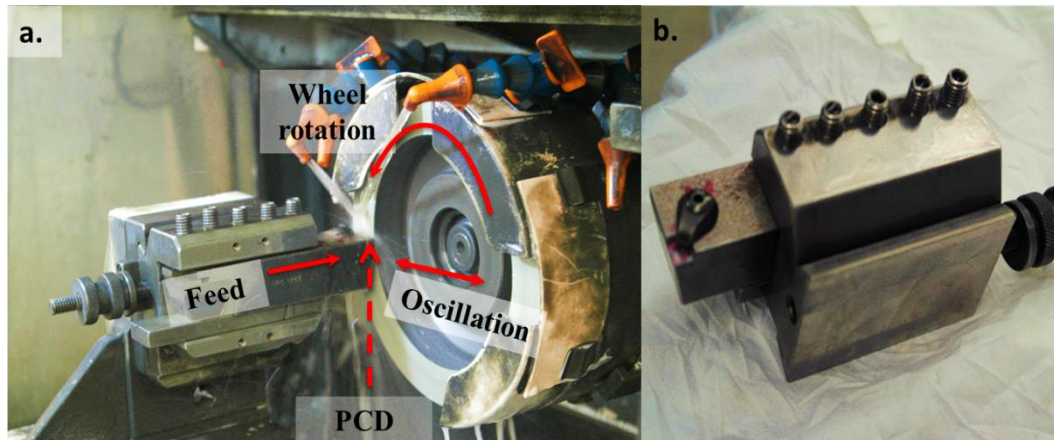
Grinding process of PCD a. Machine setup b. PCD insert holder
